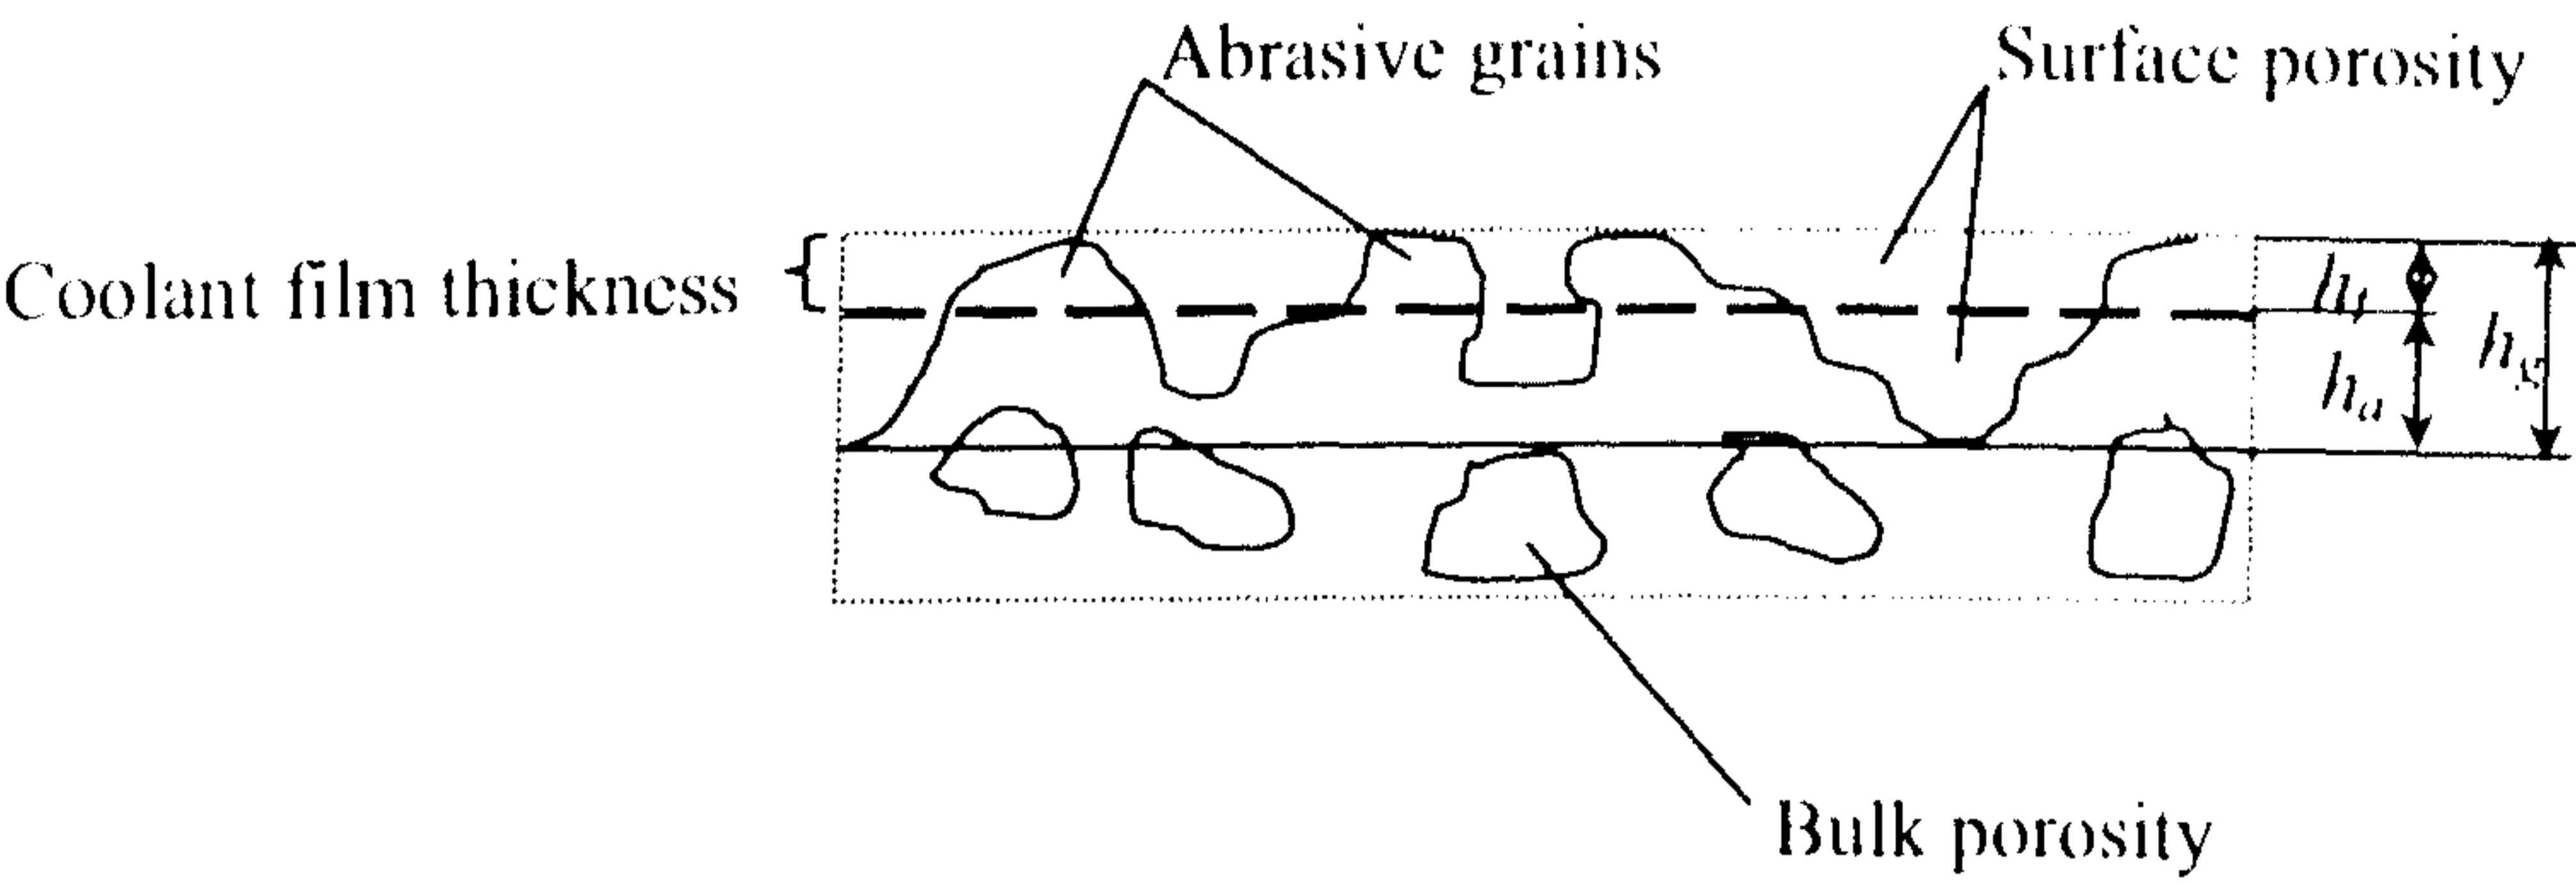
Schematic illustration of the grinding wheel surface porosity.
